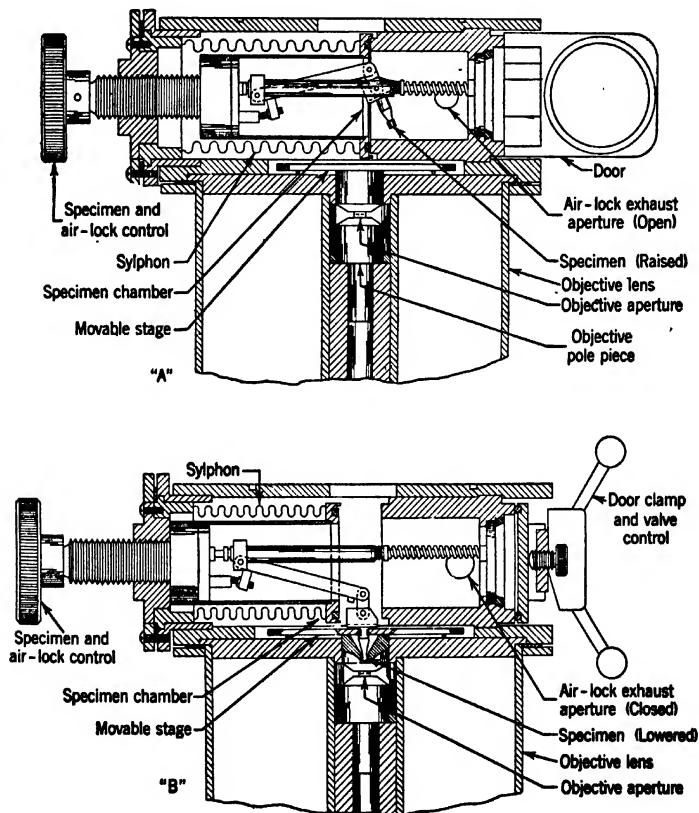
Specimen Chamber Mechanism of the Type B Electron Microscope (Section): (A) Chamber Open; (B) Chamber Closed with Object in Place.
